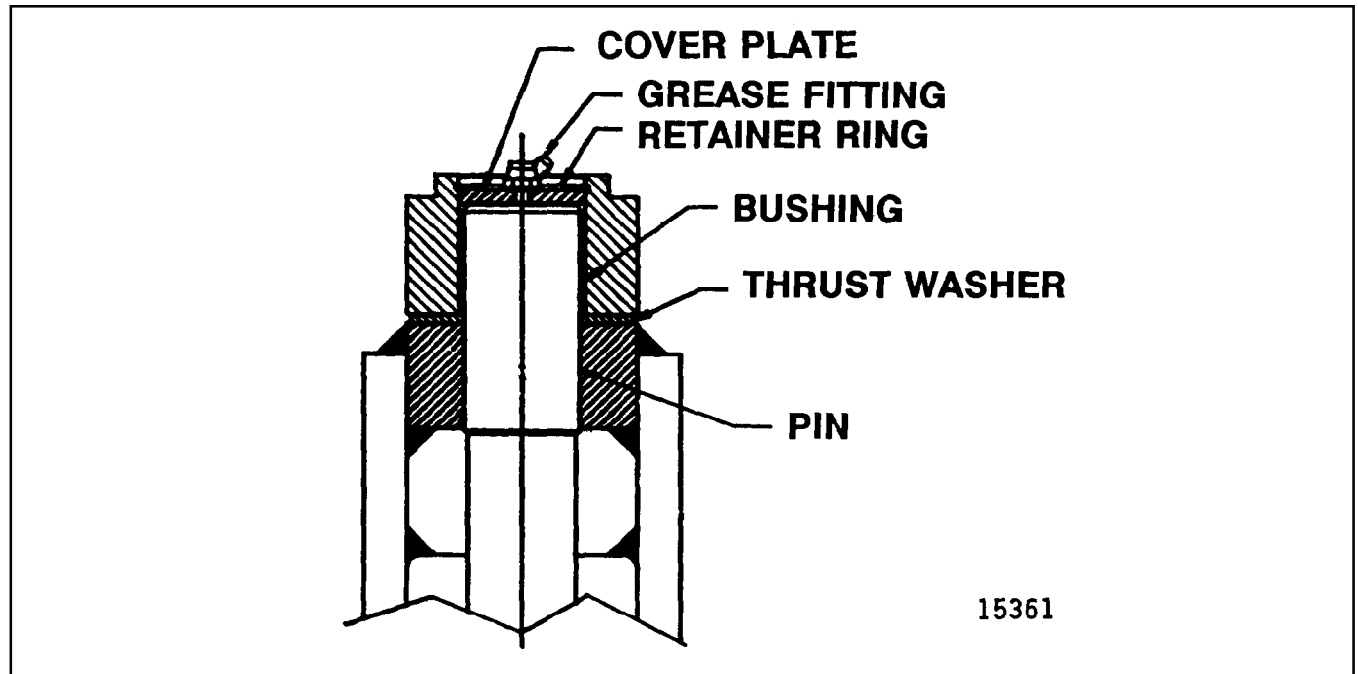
CROSS SECTION OF FRONT END OF PIVOT PIN ASSEMBLY
